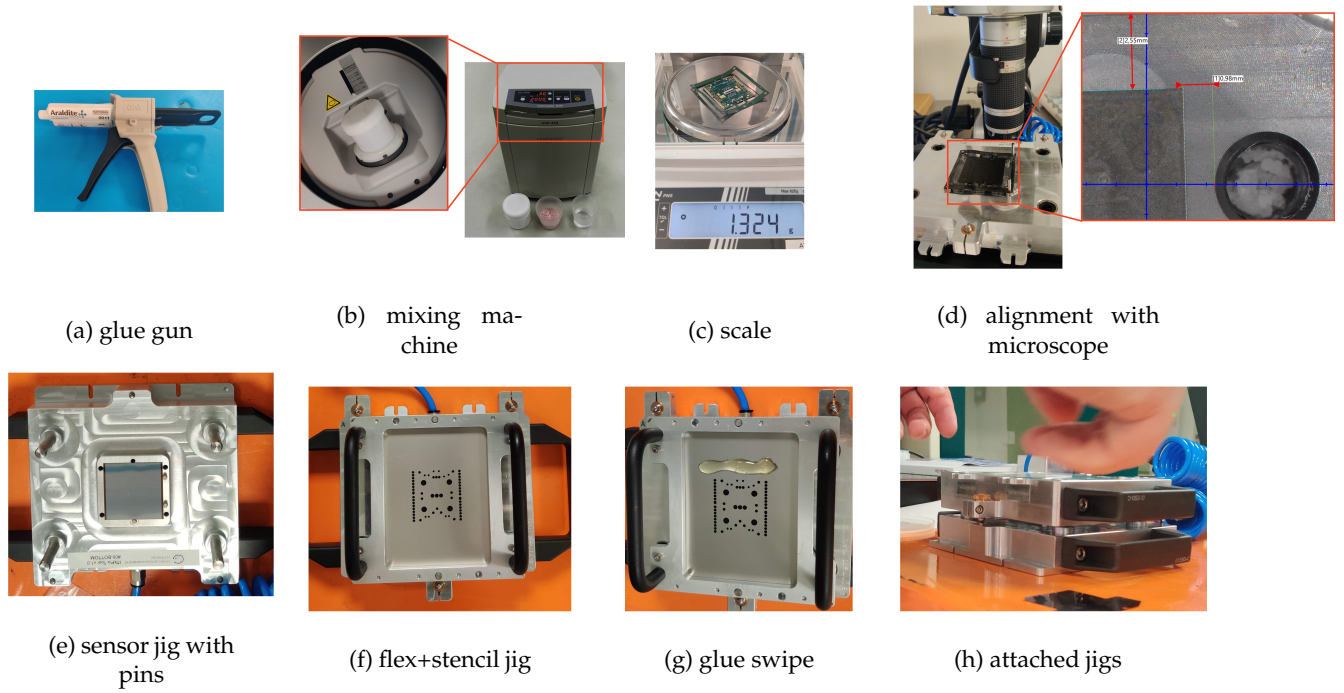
Procedure of gluing the hybrid module to a PCB at LPNHE.
